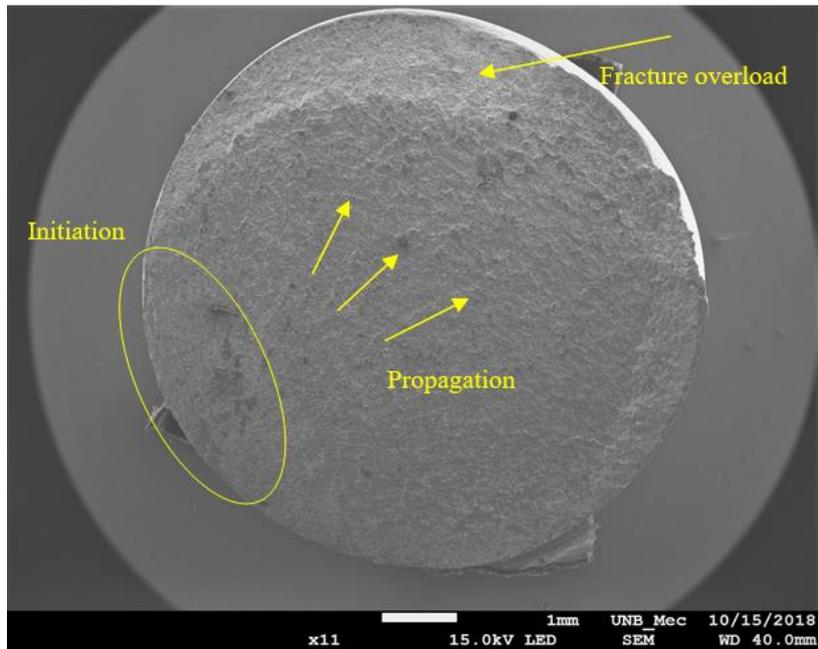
Surface of fracture of smooth specimens. MEV. 11x
